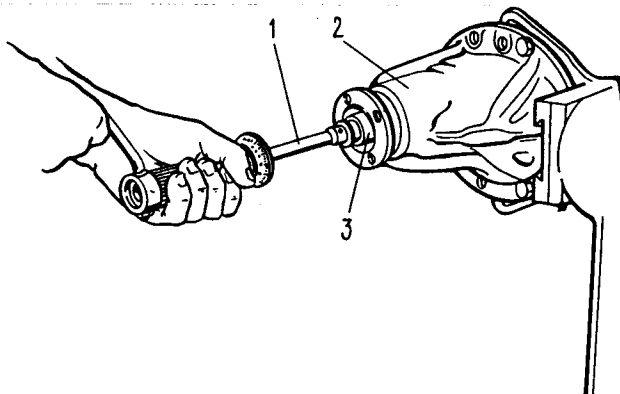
Checking Preload of Drive Pinion Bearings:
